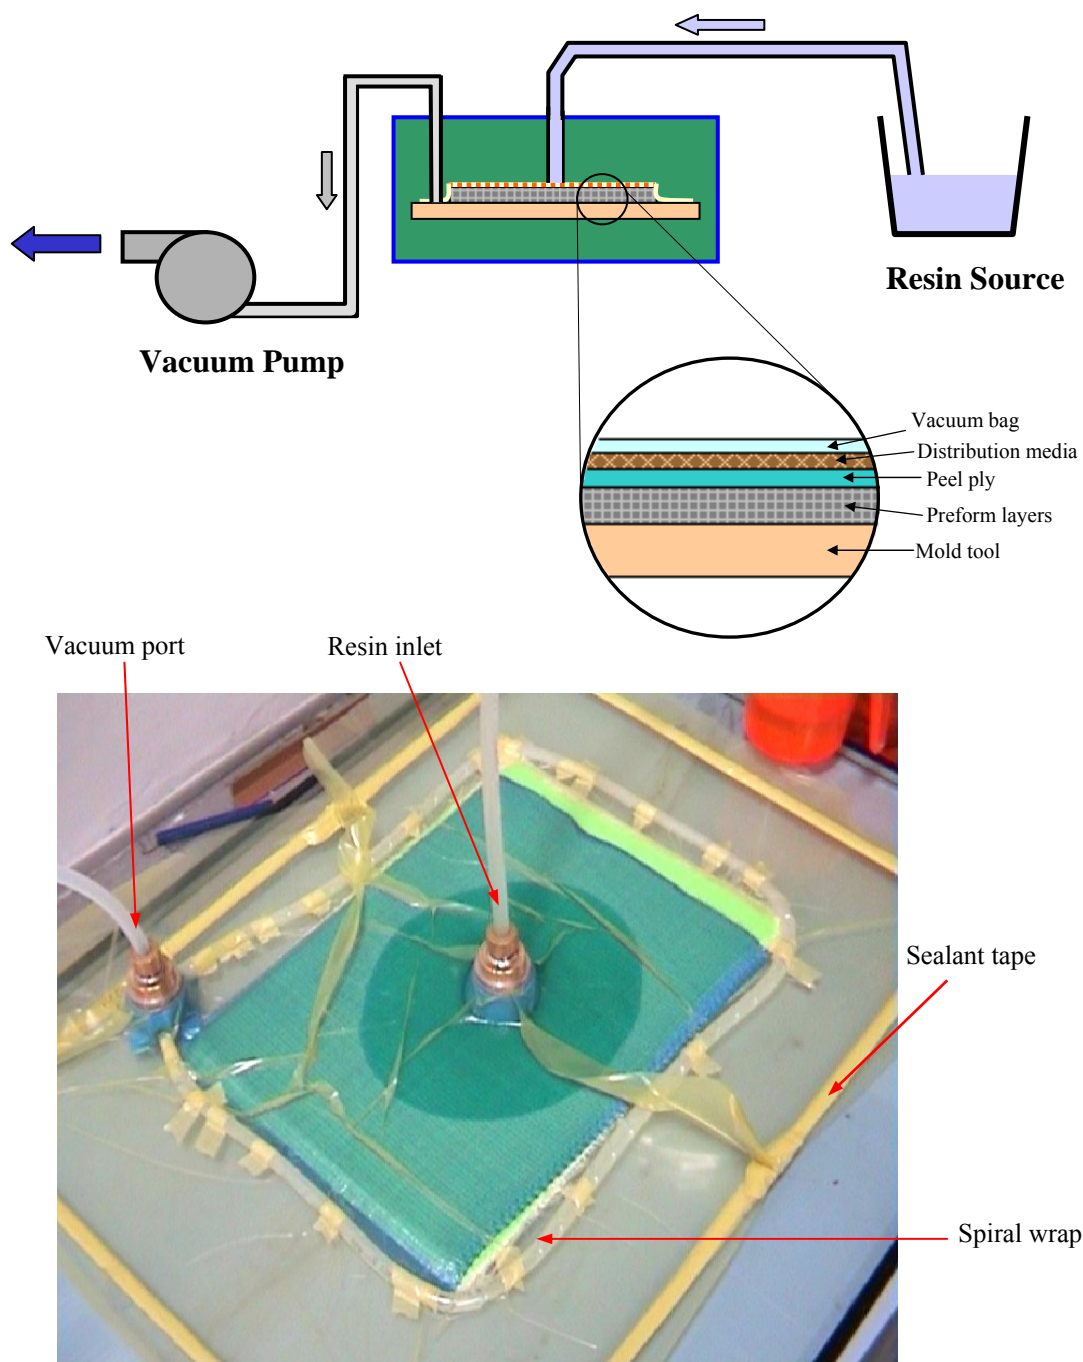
Vacuum assisted resin transfer molding process and fabrication setup
